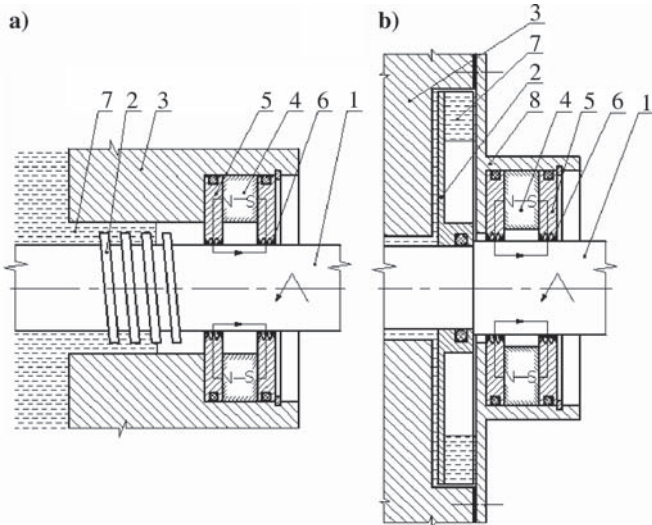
Double rotating shaft seal: a) composed of screw seal and magnetic fluid seal; b) composed of centrifugal seal and magnetic fluid seal: 1 – shaft, 2 – screw groove or rotor, 3 – casing, 4 – permanent magnet, 5 – pole shoe, 6 – magnetic fluid, 7 – sealed liquid, 8(b) – cover
